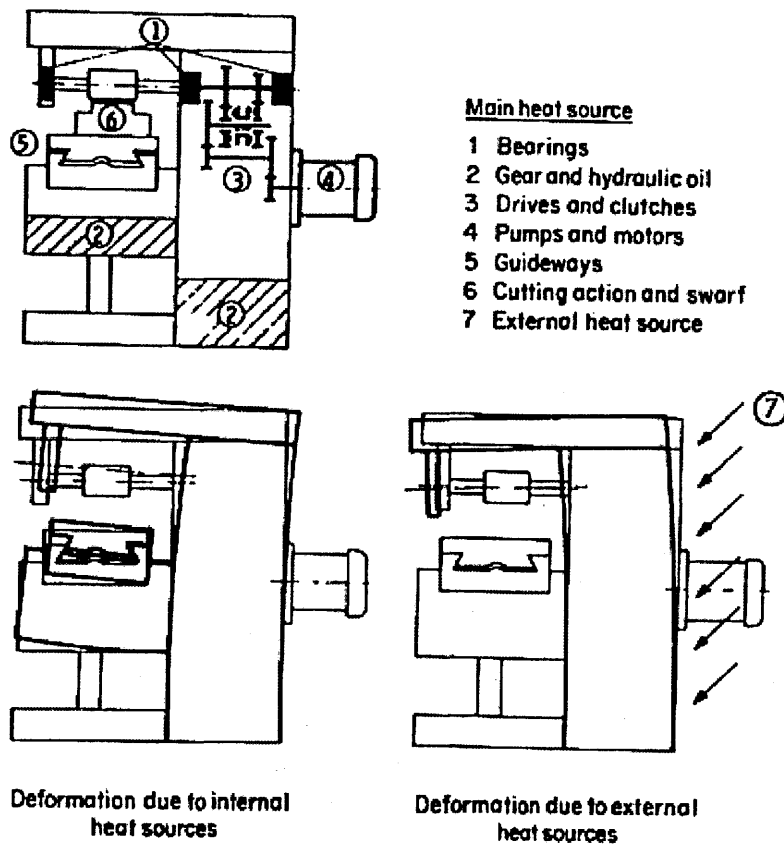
Examples of thermally induced displacements on a milling machine [2]
